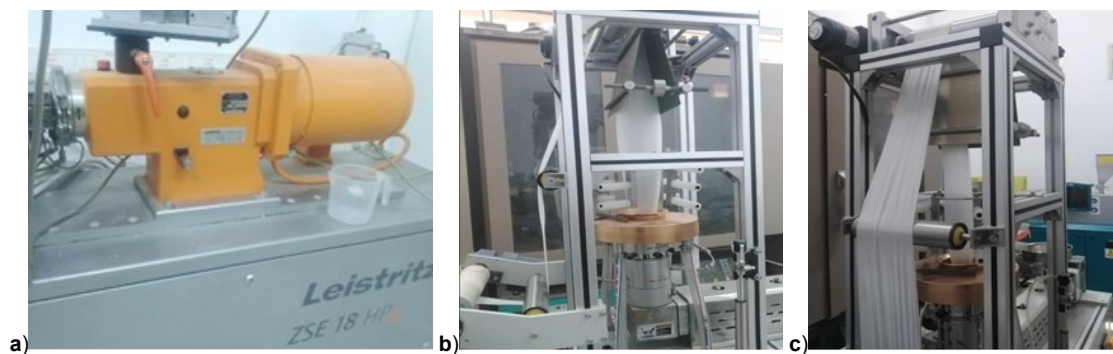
a) Twin screw extrusion machine and b-c) blown film extrusion process.
